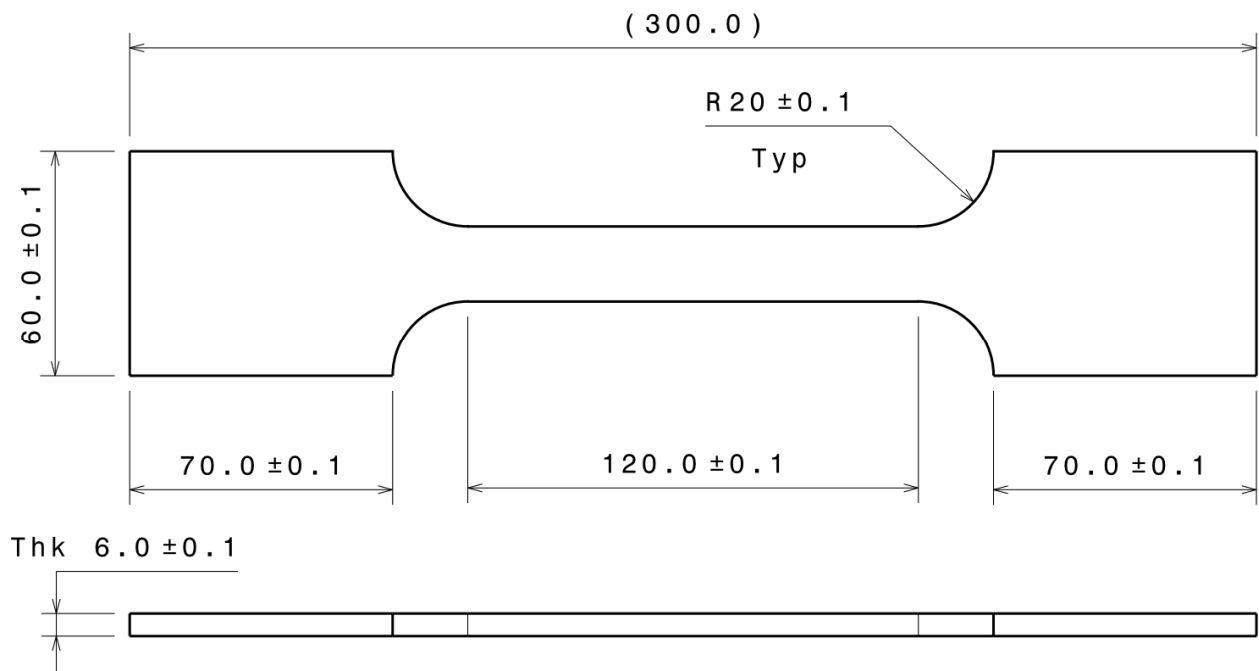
Dog-bone specimen: shape and dimensions. All dimensions are in millimeters (mm).
